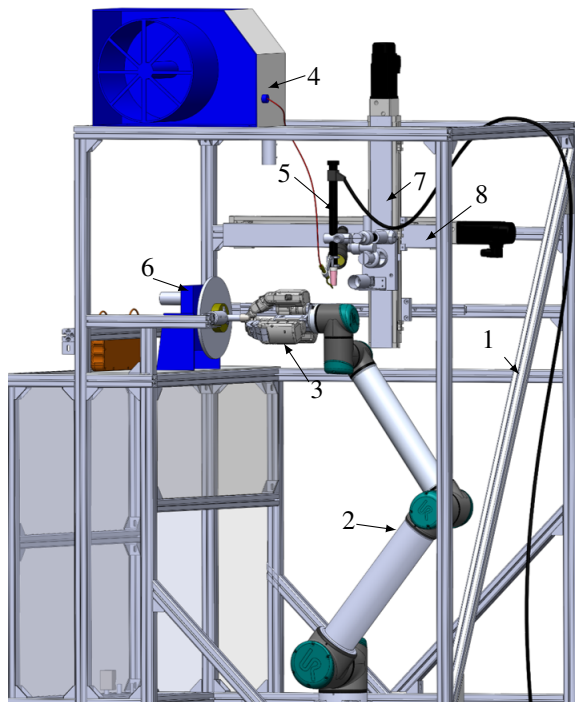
SERFOW cell: 1) aluminium structure, 2) robotic arm, 3) smart grasper, 4) wire feeder, 5) torch, 6) turn-table, 7) “Z” and 8)“X” linear motor drives.
